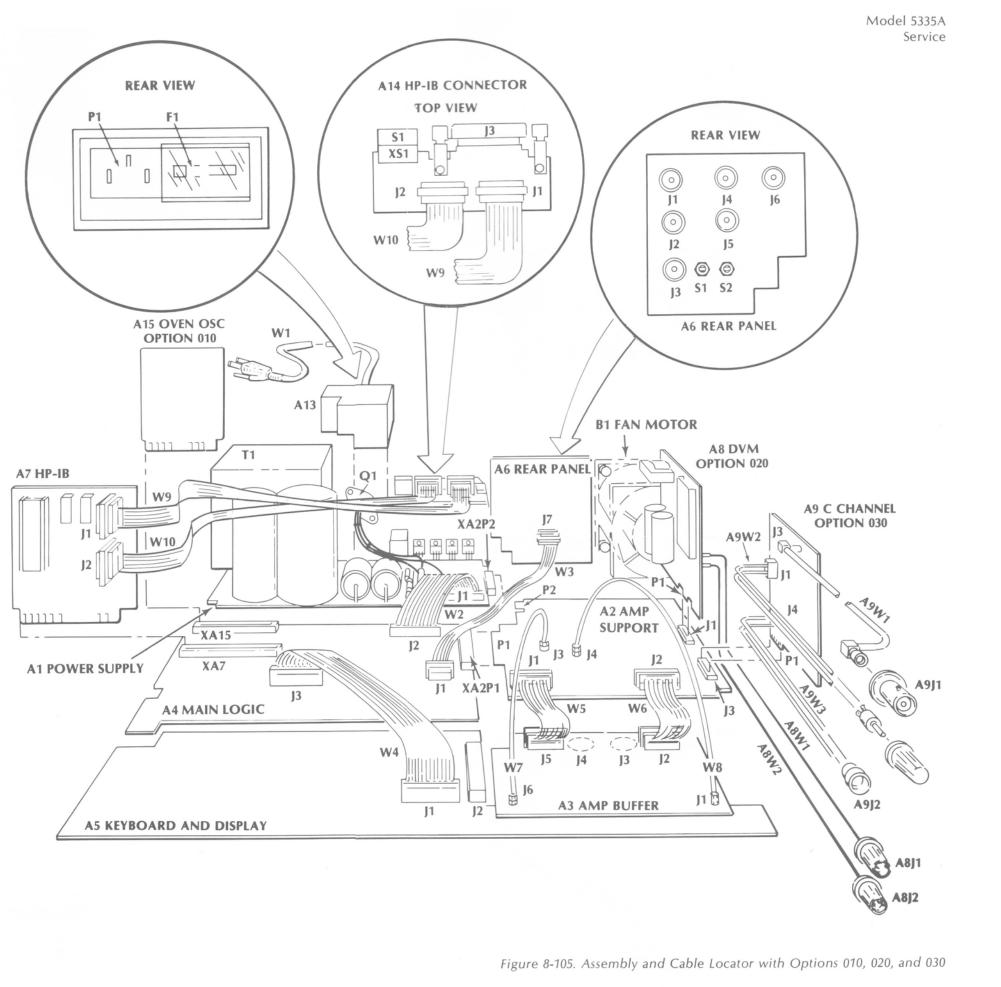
ASSEMBLY AND CABLE LOCATOR WITH OPTIONS 010, 020, AND 030
